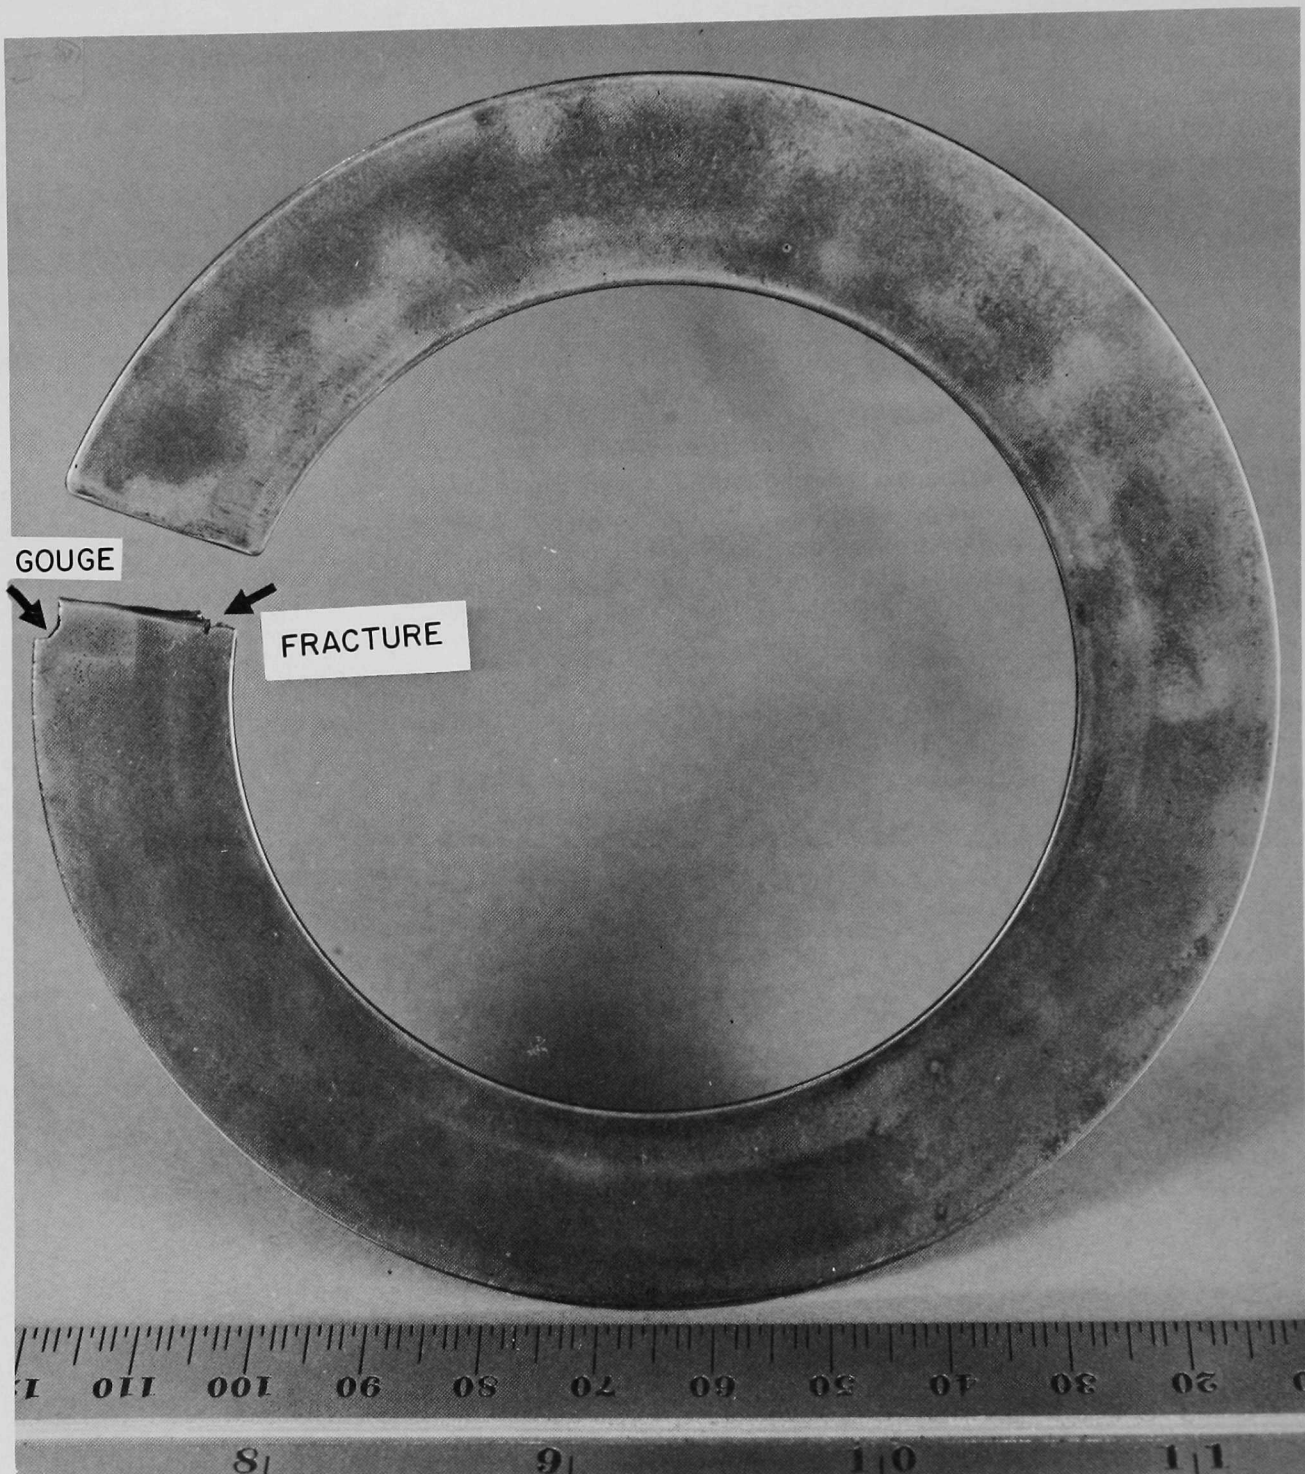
HYGAS Valve Assembly Leaf Spring. The spring is helical and the fracture surface and gouge are readily visible. ANL Neg. No. 306-77-546
